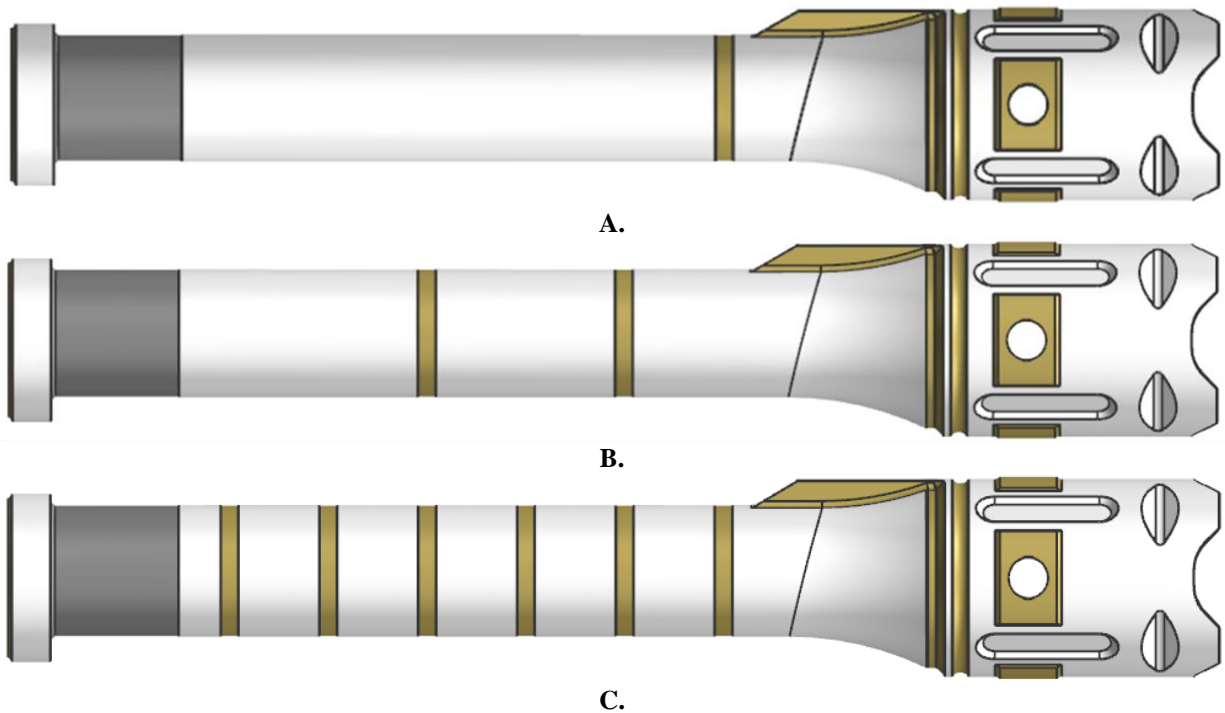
Examples of the sample tube unique identification created via barcode stripes. Images shown correspond to tube binary numbers A) 1 B) 10 and C) 63, which is the worst case hot barcode pattern.
